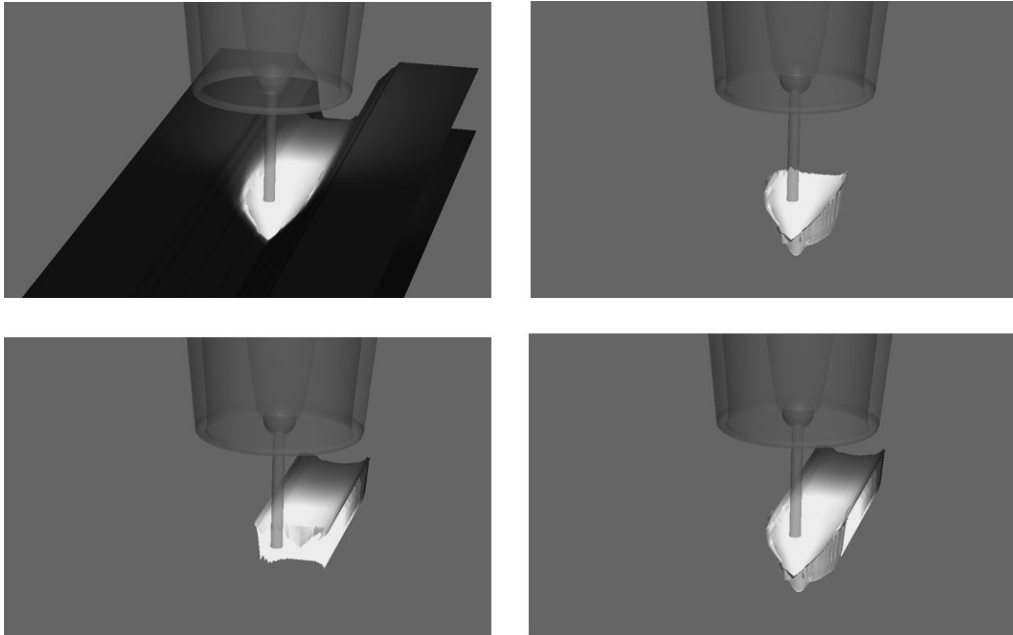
3D visualization of numerical simulation results calculated by SimWeld® DLL (Top left: overall results, top right: weld bead only, bottom left: weld seam only, bottom right: combined weld bead and weld seam)
